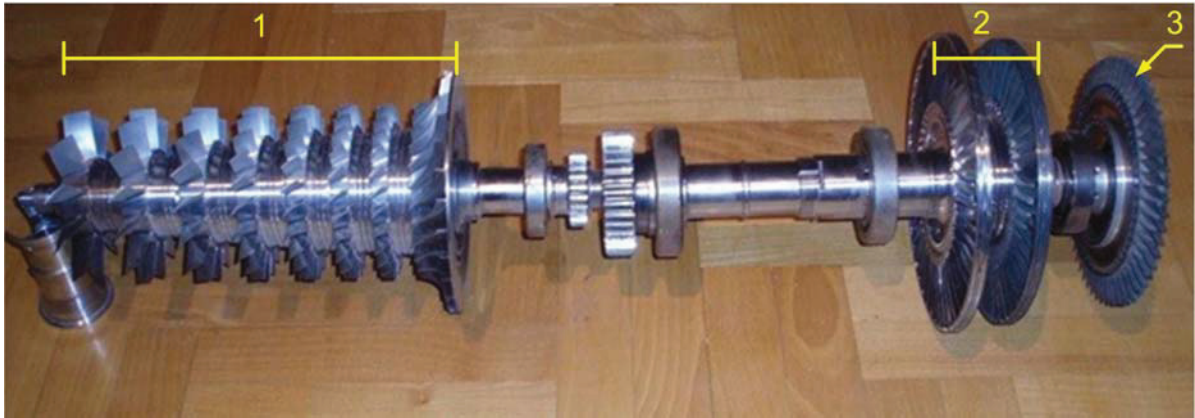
Rotor system of GTD 350, 1– compressor consists of seven degrees of axial compressor and one radial, 2 - power turbine, 3 - turbine compressor (1+3–gas generator) [9]
